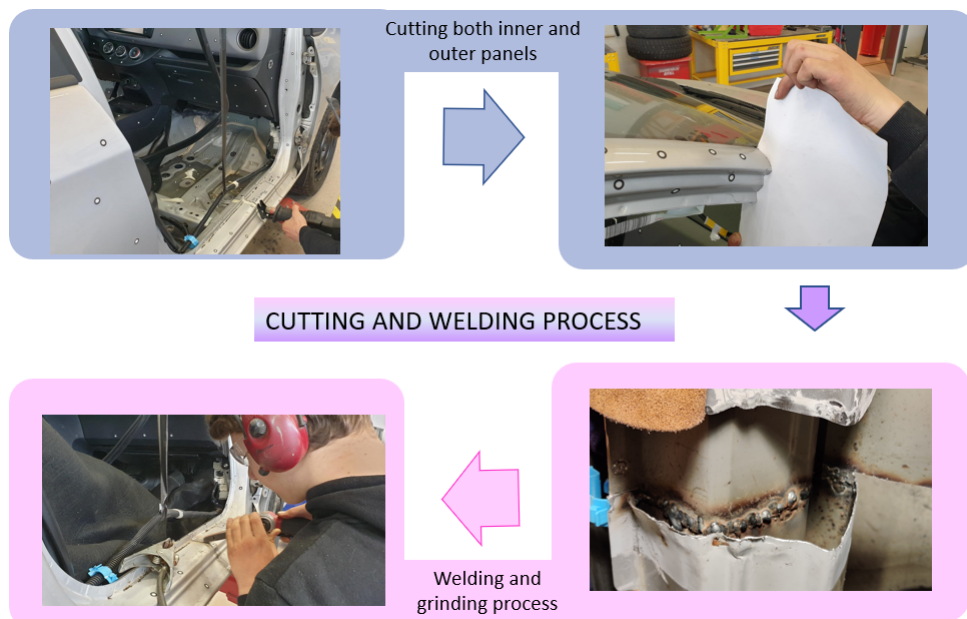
Cutting and welding process followed for preparing the test car
